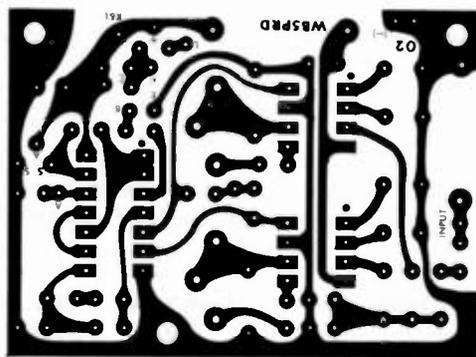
PC board, foil side. This is suitable for reproducing the board for those who would like to do so.
